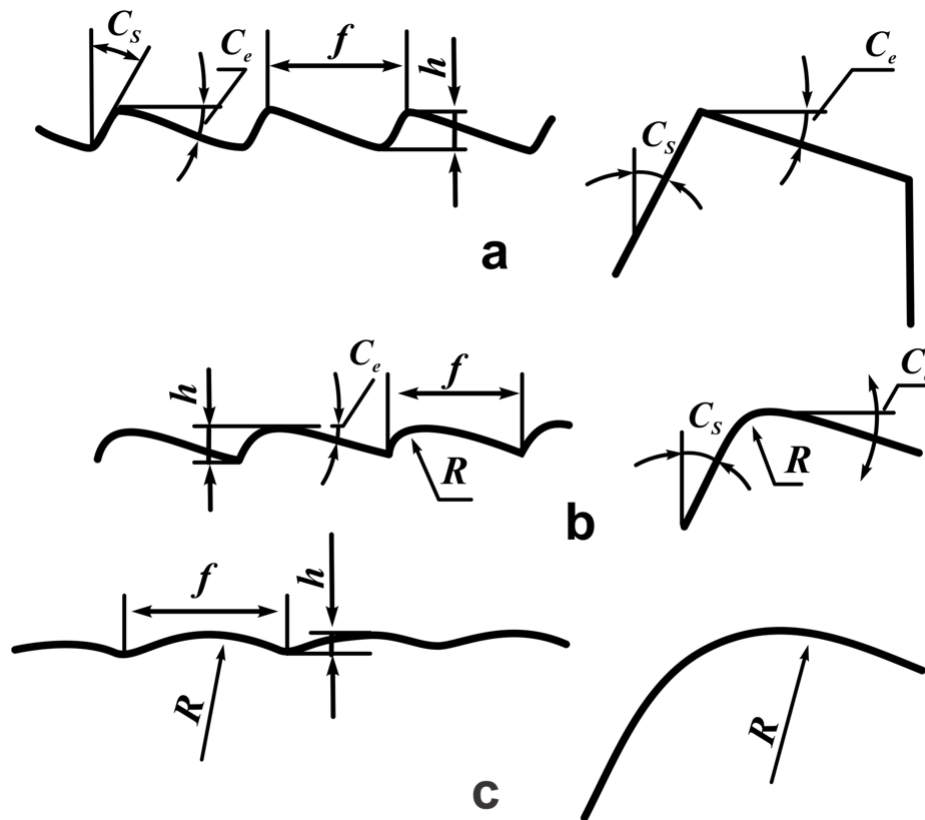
Machined profile result using different cutting edge profiles, where f -feeding, mm/rev, R -cutting tool radius, h - machined profile height.
